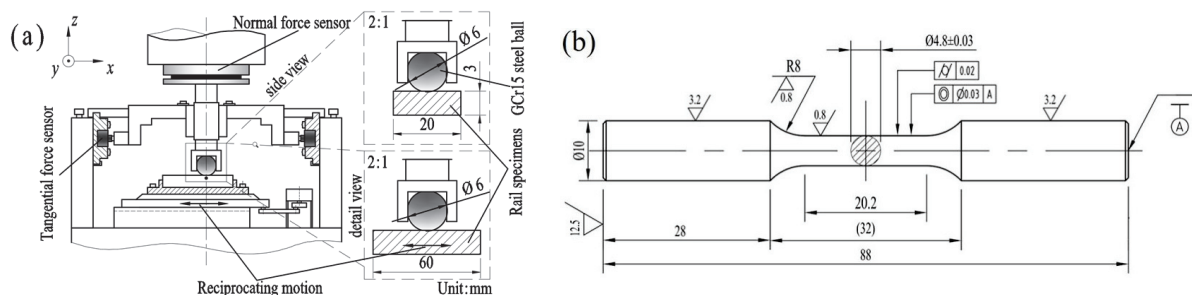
(a) Structure diagram of reciprocating friction and wear test bench, dimensions, and contact configuration of rail and GCr15 steel ball specimens, (b) size of tensile test specimens.
